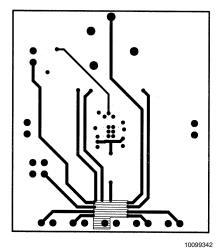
Recommended LQ PC Board Layout: Lower Inner-Layer Layout
